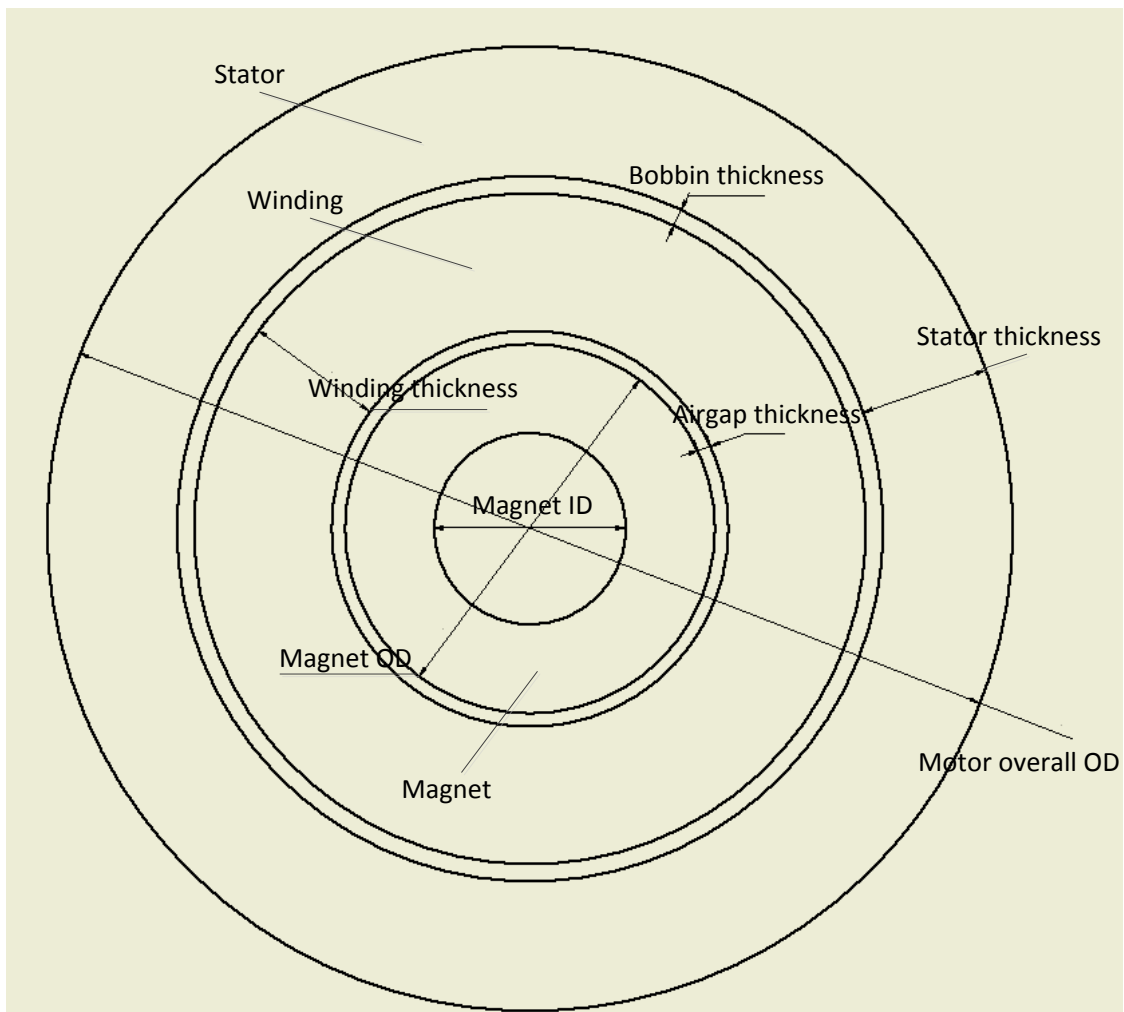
The drawing of standard slot-less structure permanent magnet motor with marked major motor variables from cross-section view
